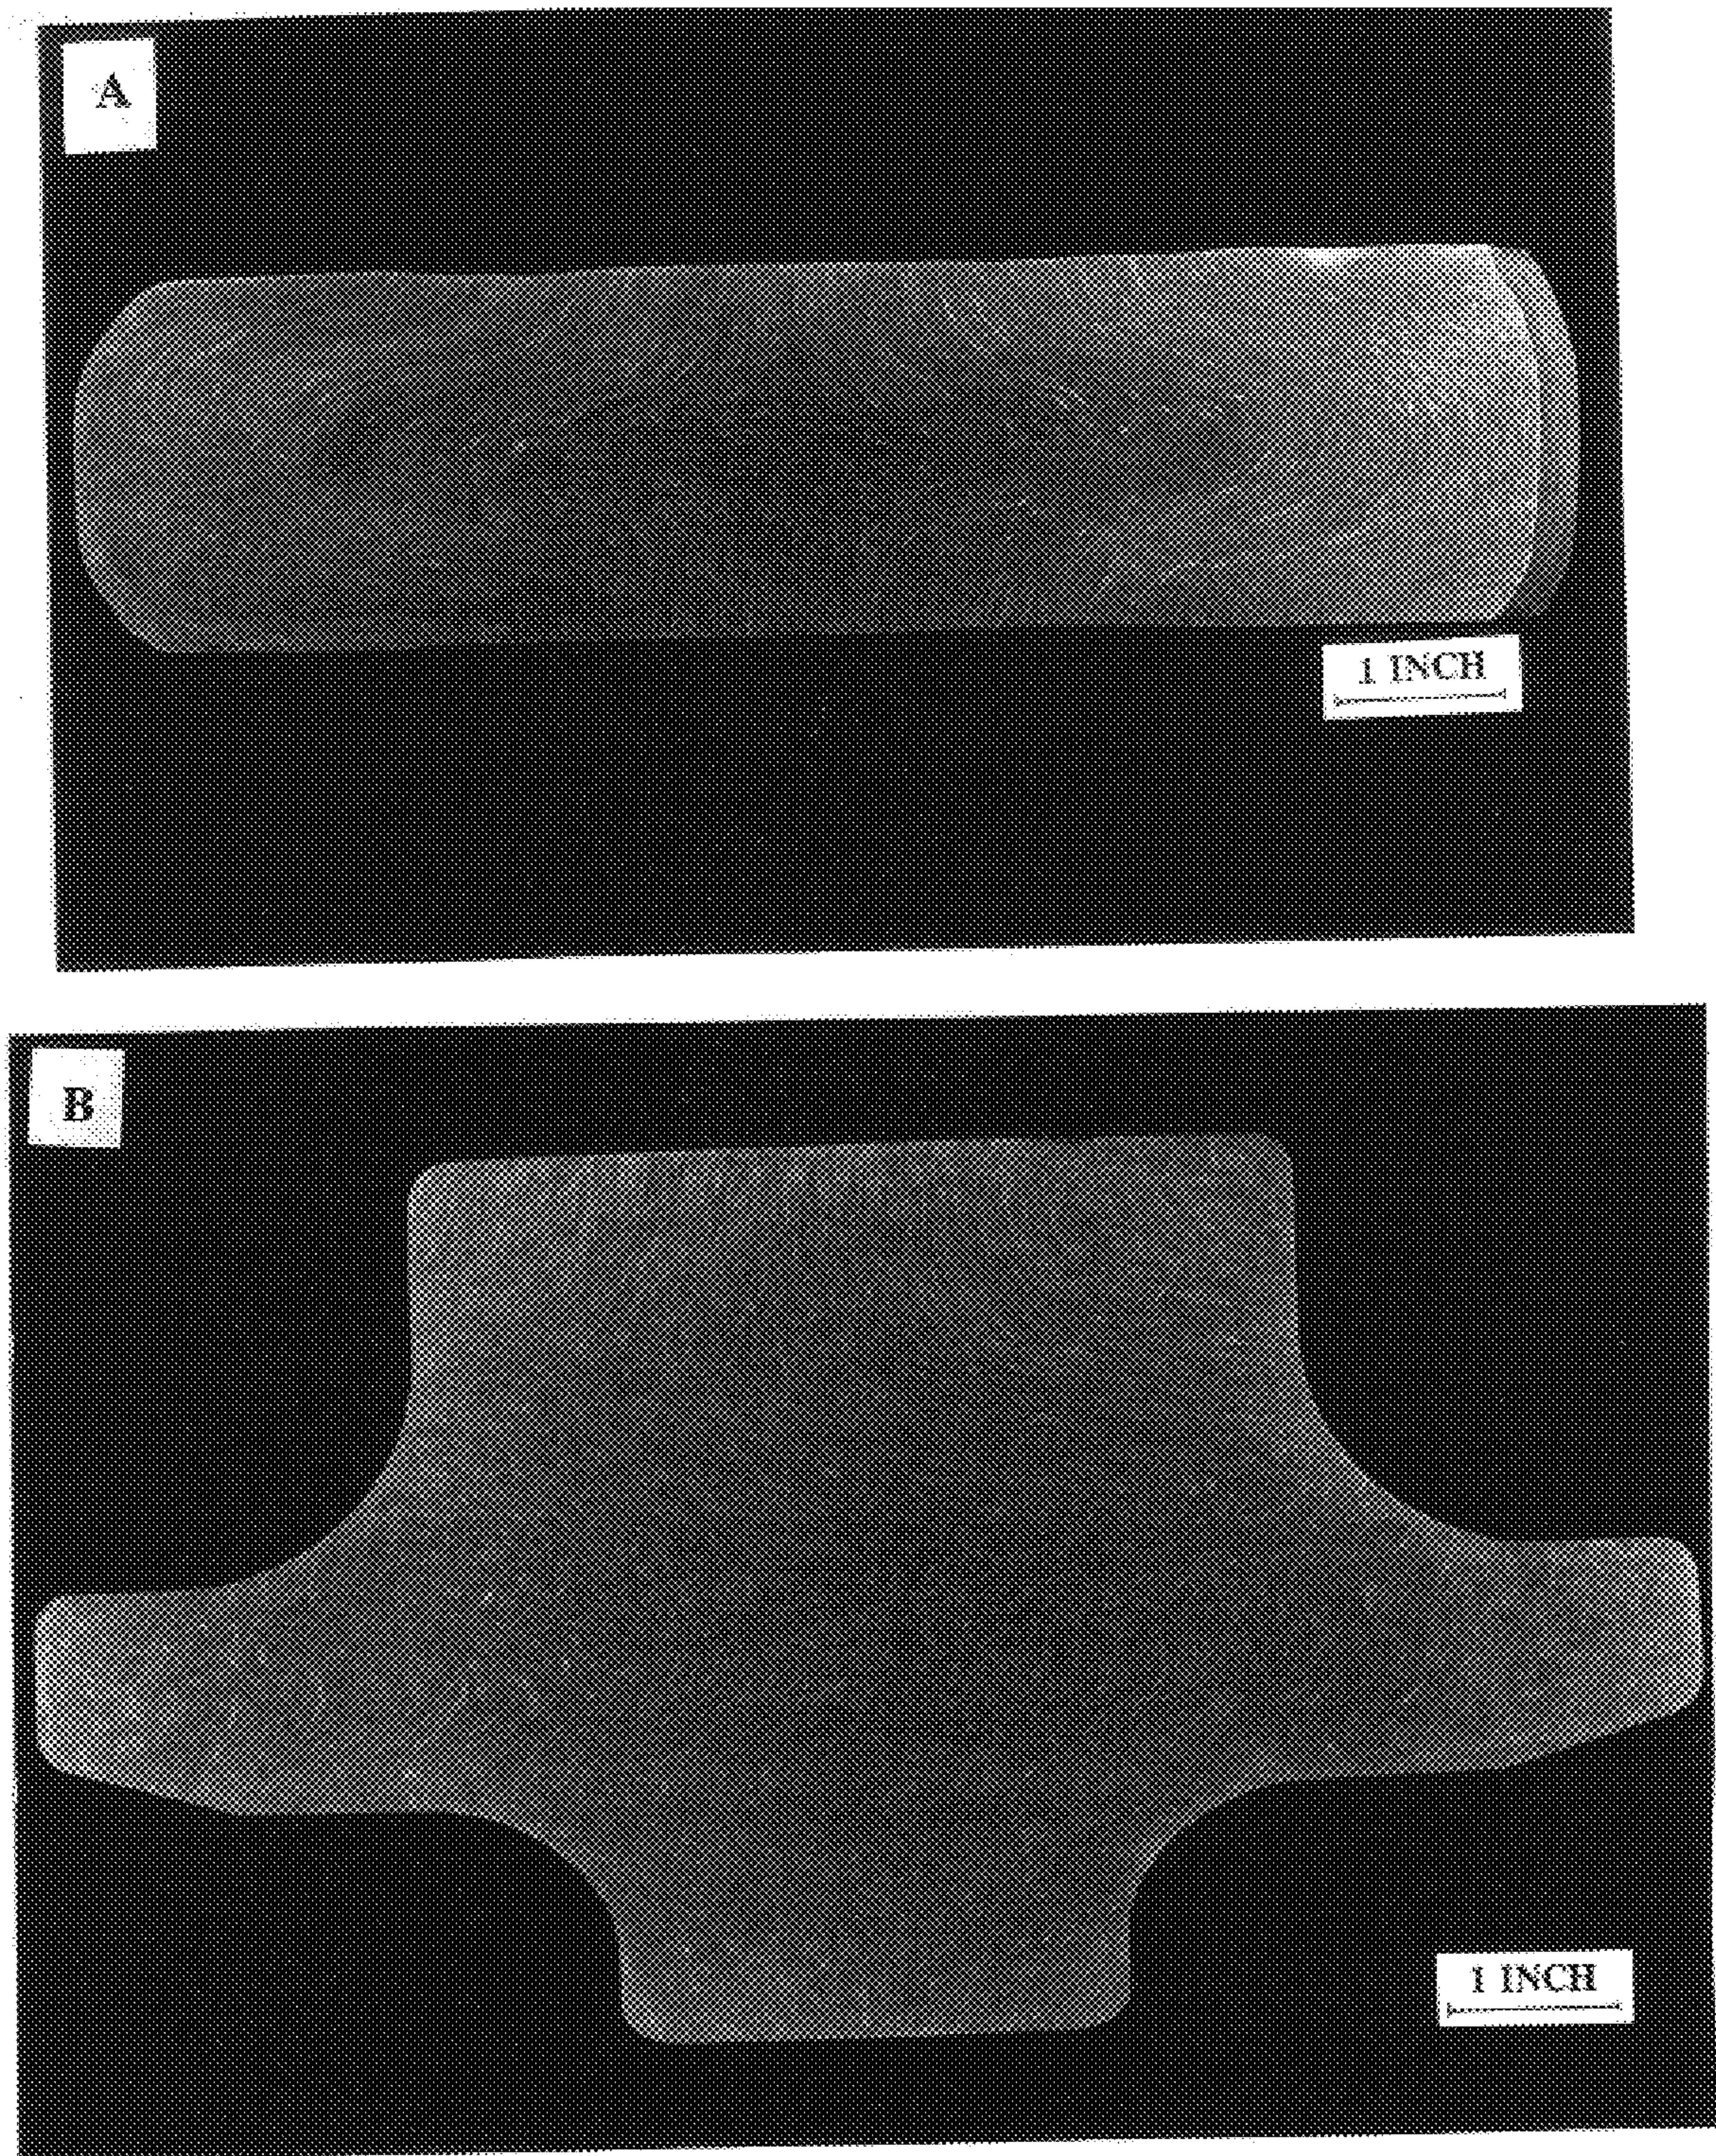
Illustration of articles produced using fine-grain forging method of the present invention: (A) pancake forging (~2.0in. x 9.0in.) and (B) impeller shape machined from forging (~5.5in. x 12.0in.)
